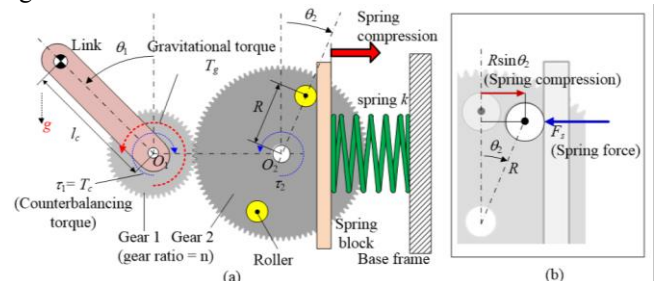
Counterbalance mechanism based on spring and gear: (a) Concept model, and (b) detail view
